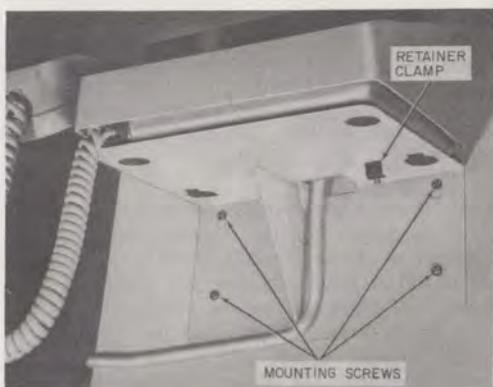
Shelf for Wall Mounting COM KEY Telephone Set (D-180656 Kit of Parts)
